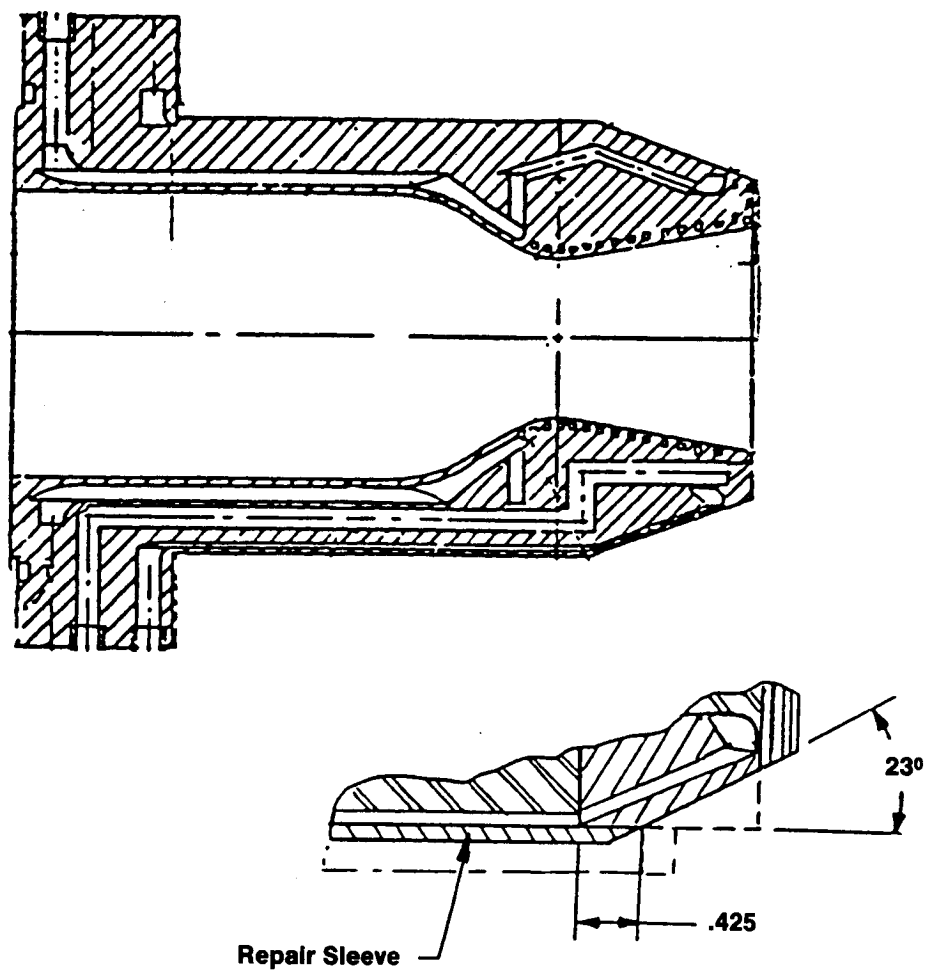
Primary Chamber -49 Assembly, Final Machine with Deviation
